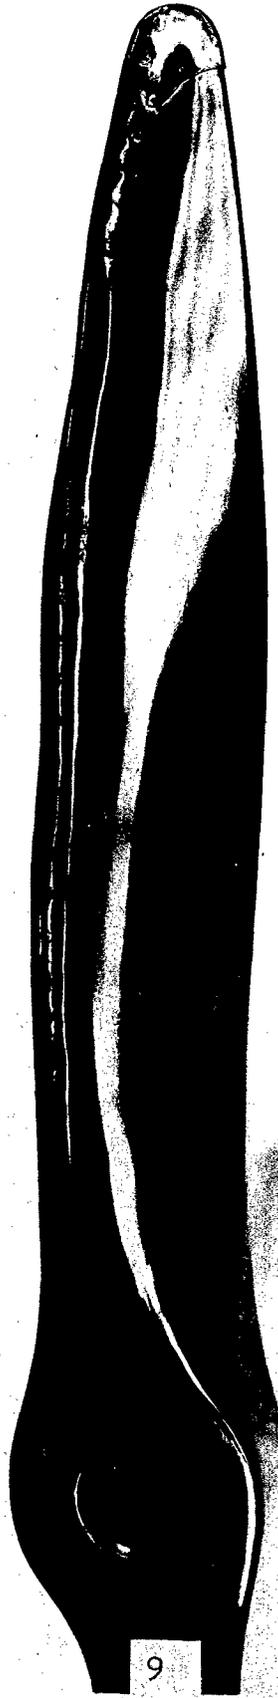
Front View Close-Up of Blade - Flottorp Standard Propeller
